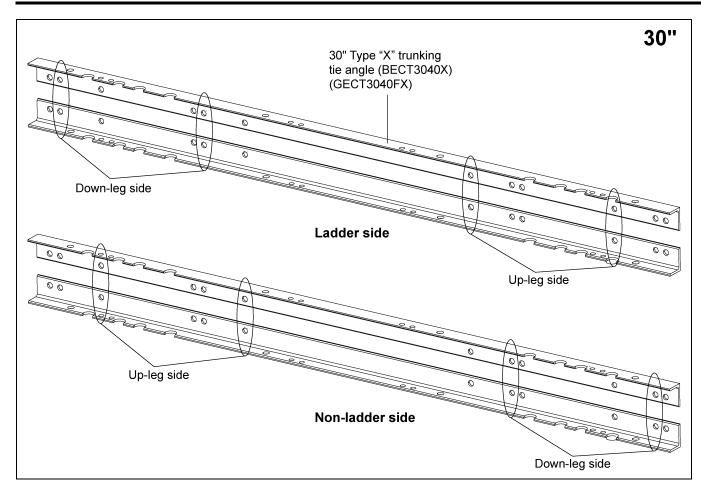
D 30" Bucket Elevator Tie Angles to Trunking Bolt Locations
